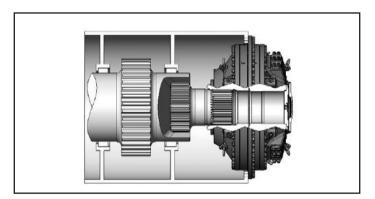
Flange mounted motor with splines and high radial load Fr on driven shaft.
